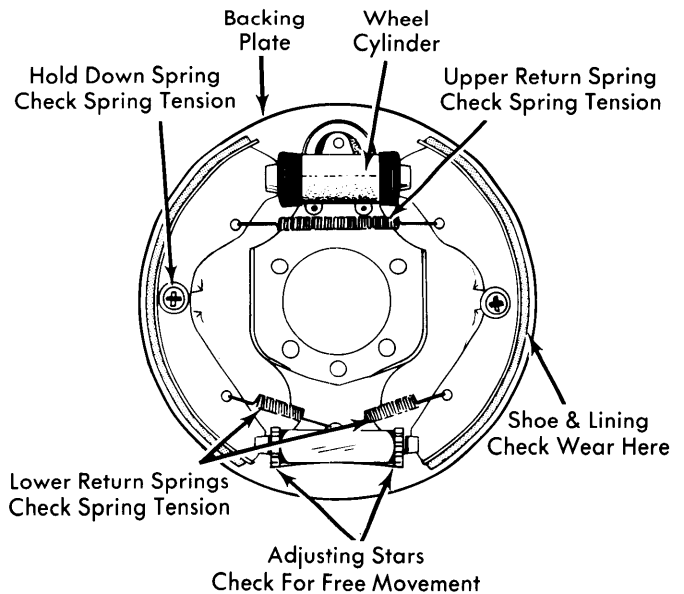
Type 1 Front Brake Assembly with Brake Drum Removed
